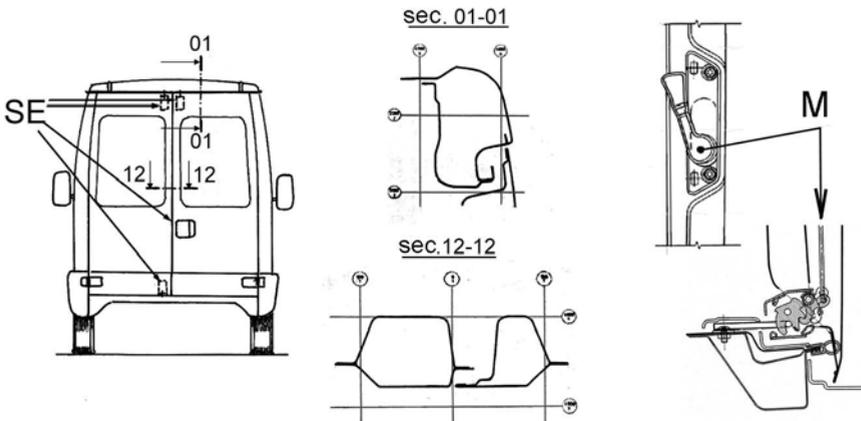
Rear twin door locks (SE) and handle layout (M). Typical door/body 01-01 and door/door 12-12 sections. M: inner central handle with lower fork latch control by rod on left door.
